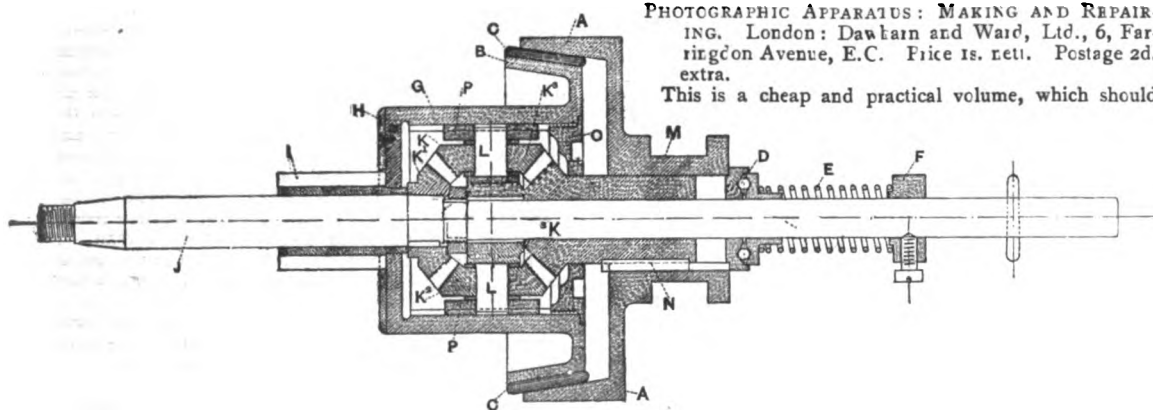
THE "DUFONT" TWO-SPEED GEAR.
